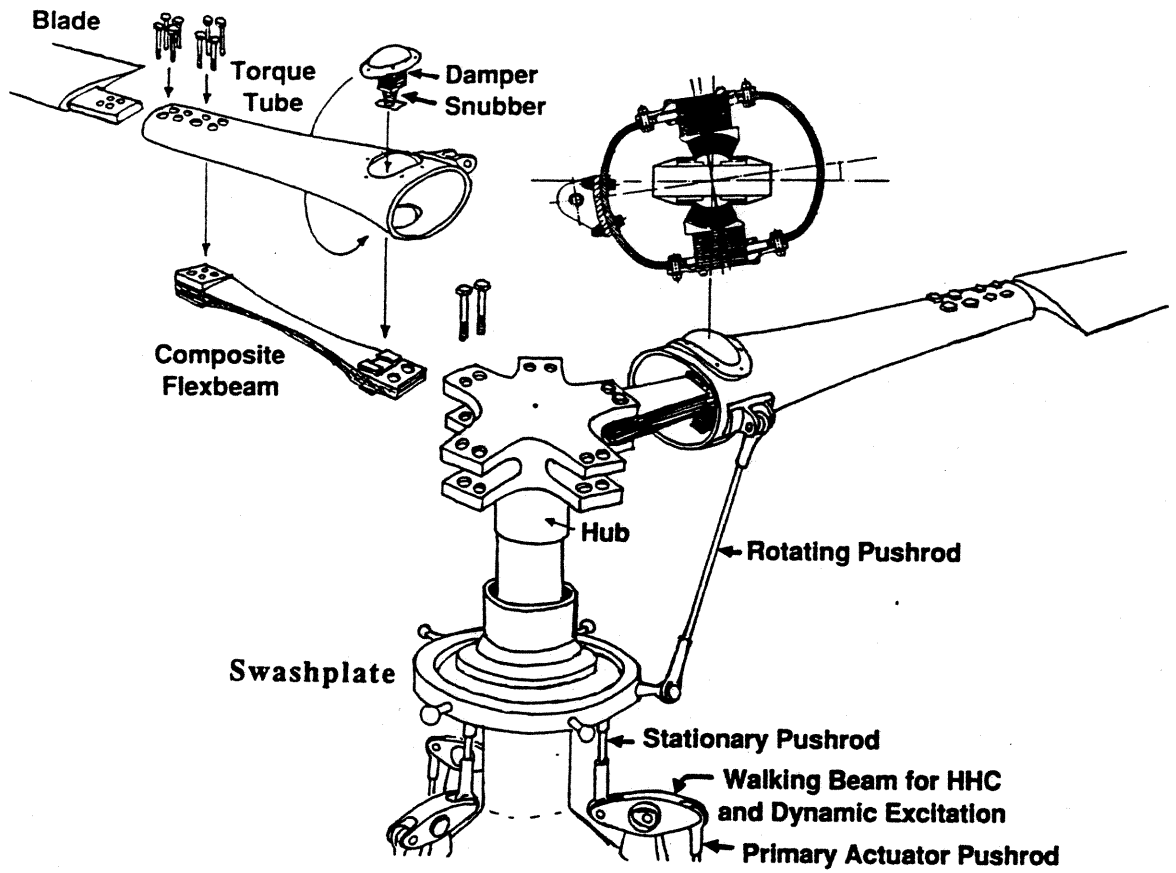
Sikorsky proof-of-concept 5-bladed bearingless main rotor.
